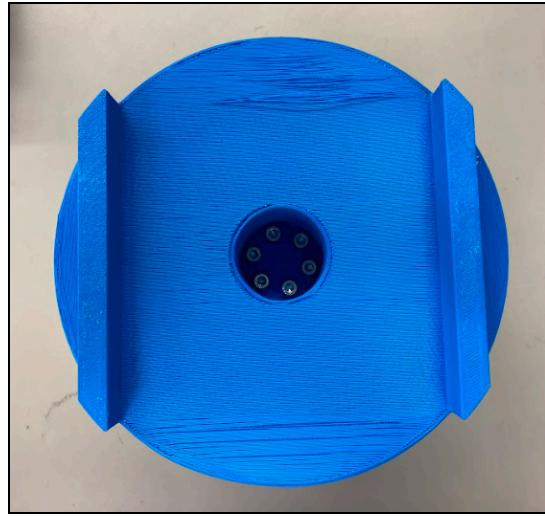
Securing J1 Mushroom Cap to J1 Motor Shaft
